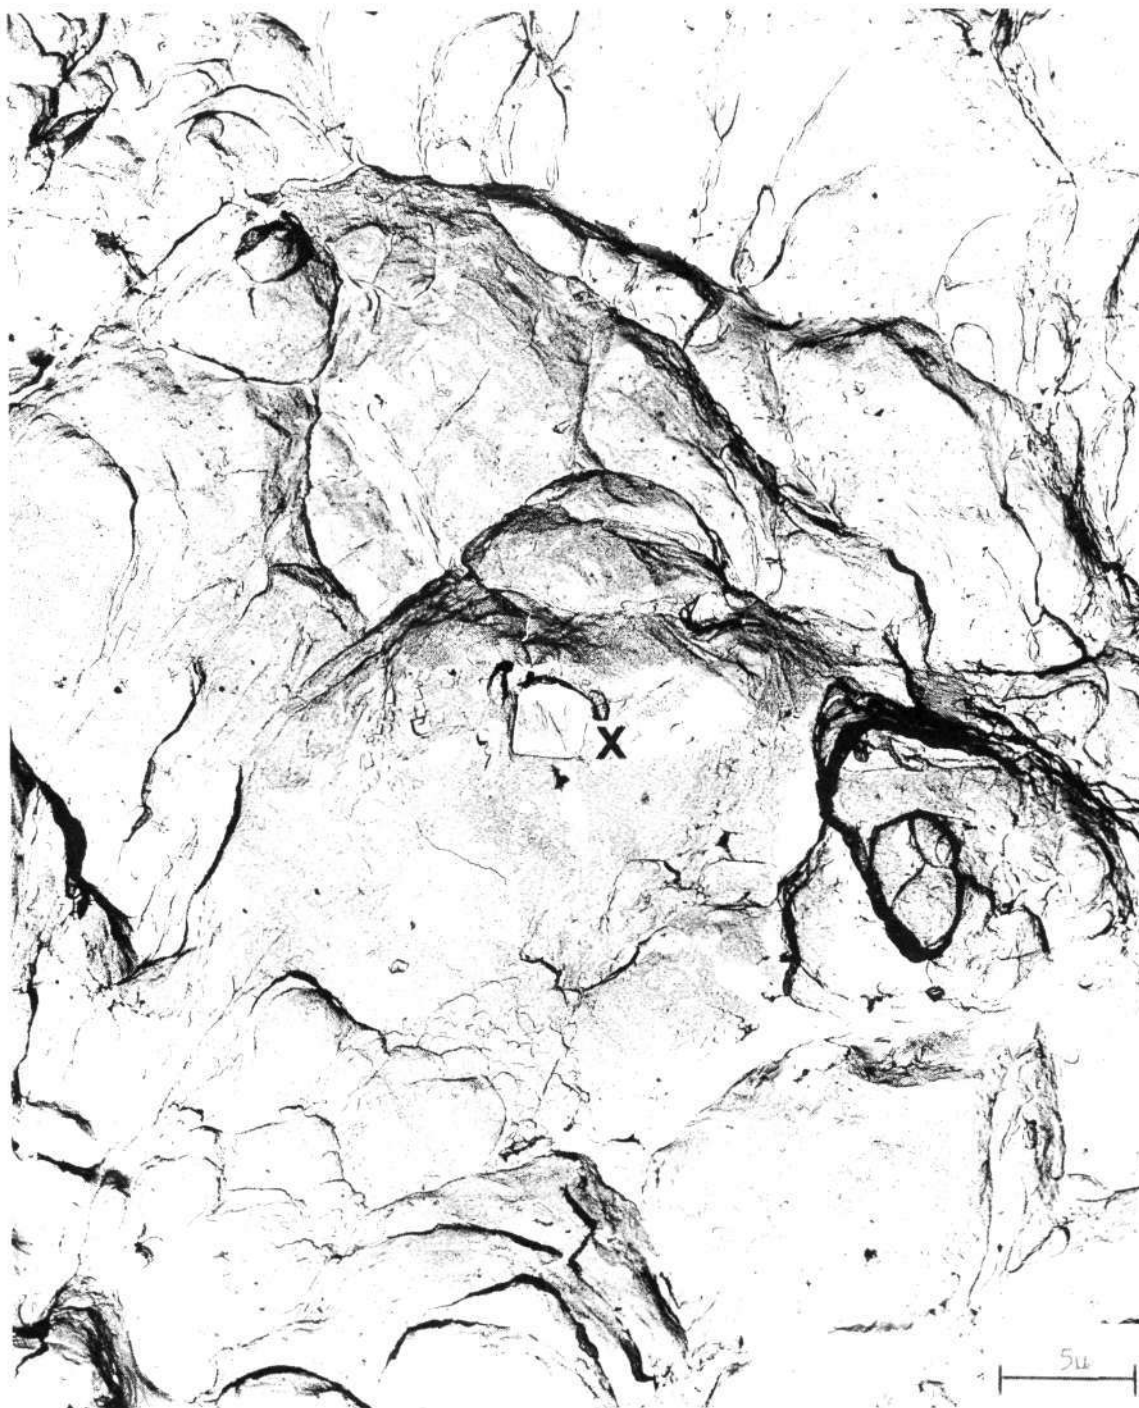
Fractograph Taken Adjacent to Fatigue Crack on K_{Ic} Specimen of High Purity 18 Ni Maraging Steel ("X" indicates cleaved titanium carbo-nitride at bottom of large dimple)
